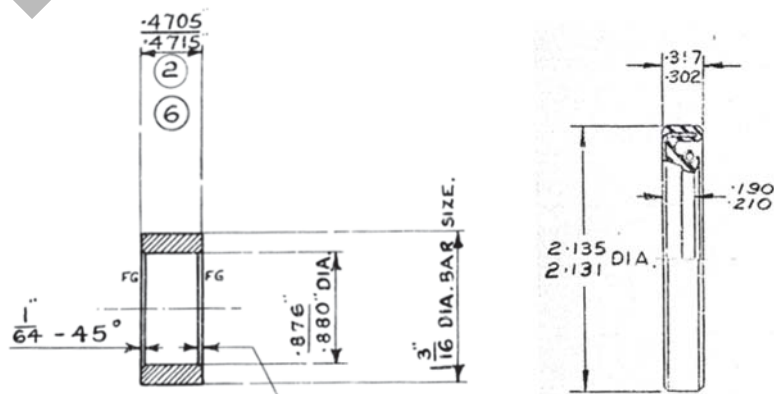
Bearing space rear hub 2A7354 and seal AYA4018.
